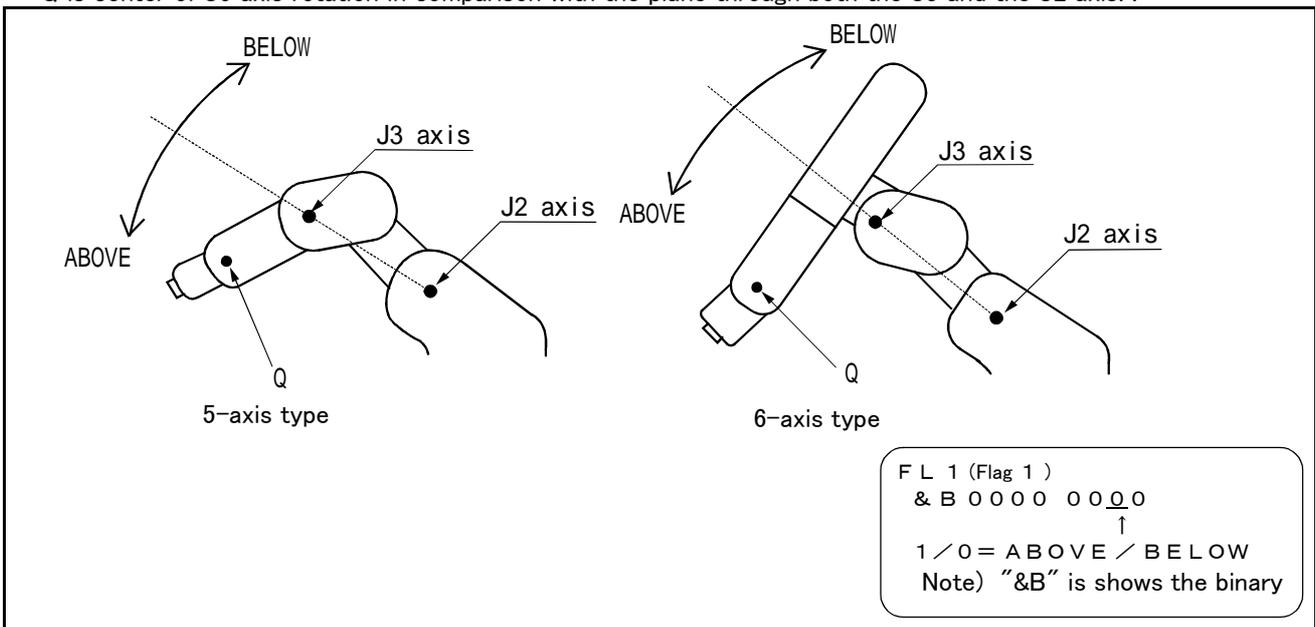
Configuration flag (ABOVE/BELOW)
